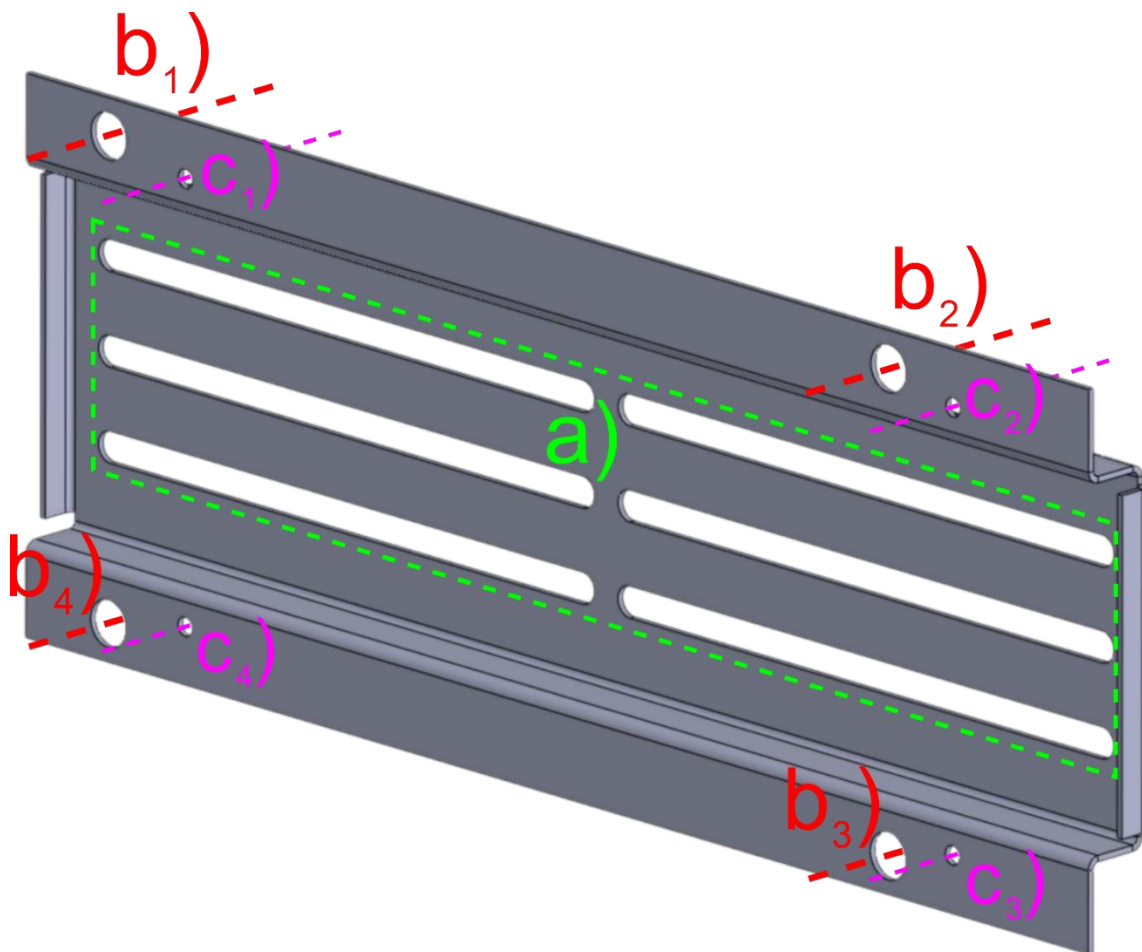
Sideview of the mounting bracket with marked mounting holes.
